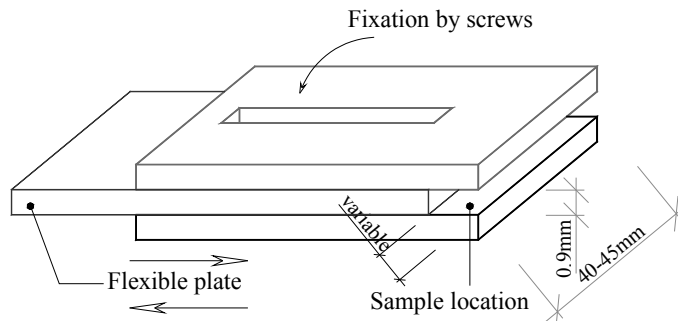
Sample holder used for to polish the machined blocks at a constant section.
